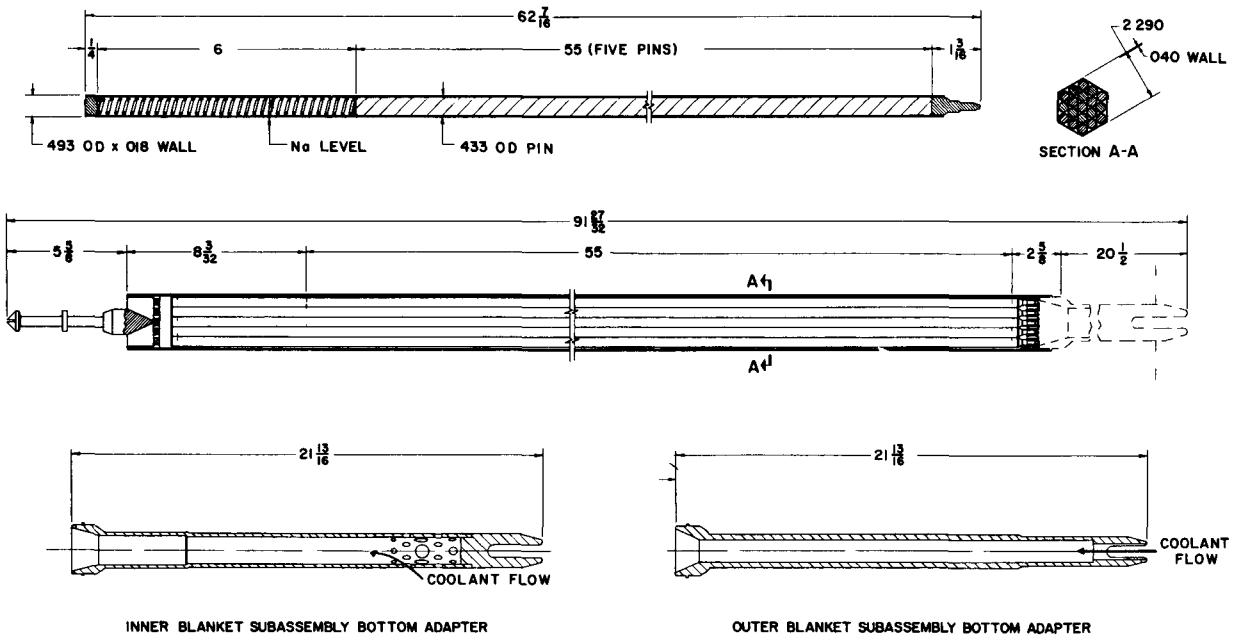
EBR-II Inner Blanket and Outer Blanket Subassemblies
